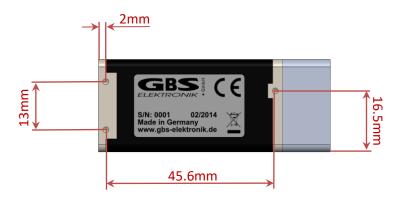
CUBE527 DIMENSIONS DEVICE MOUNTING HOLES, M2
